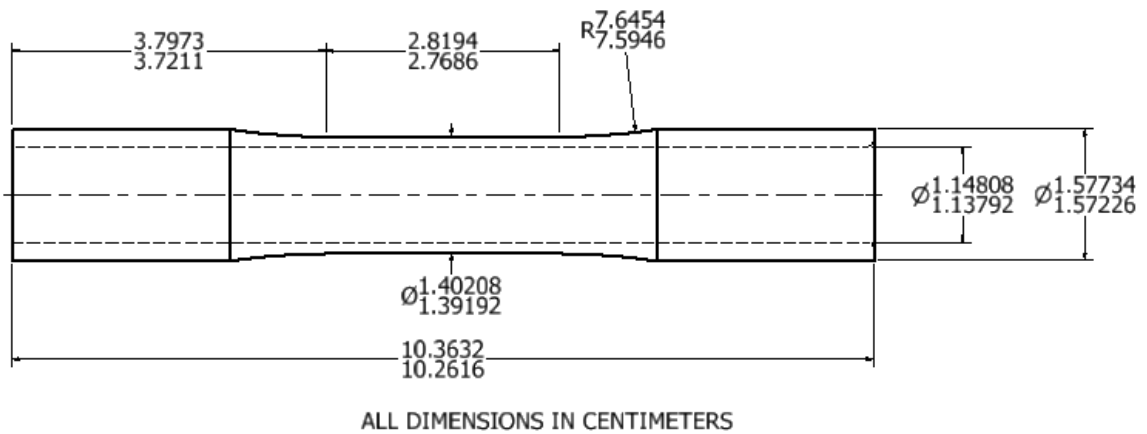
Drawing of the Modified Specimen with Critical Dimensions
